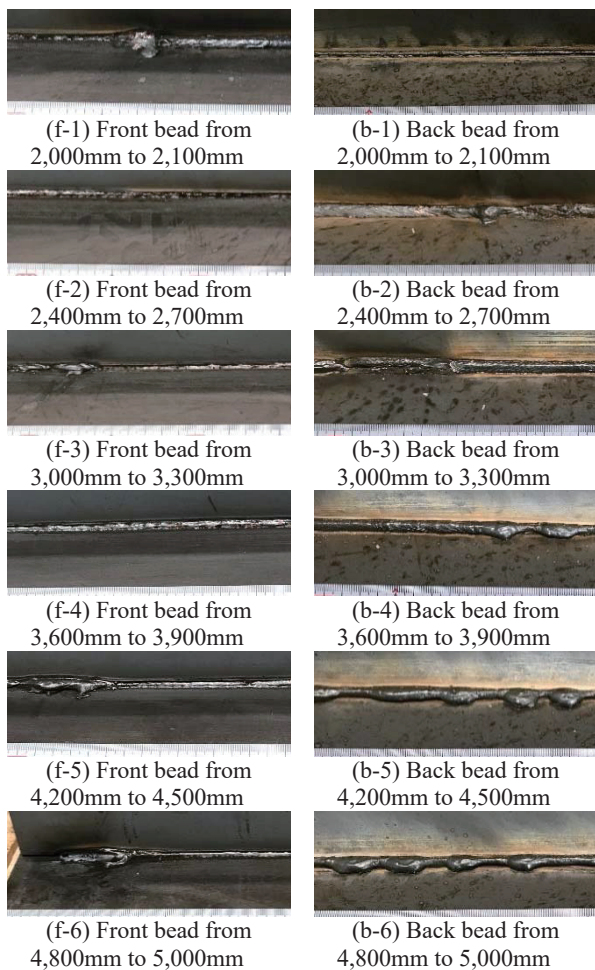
Weld bead appearance of full-penetration tee joint fabricated by one-side single pass welding. (Welding section from 2,000mm to 5,000mm, Initial gap 1.5mm, using seam tracking system).
